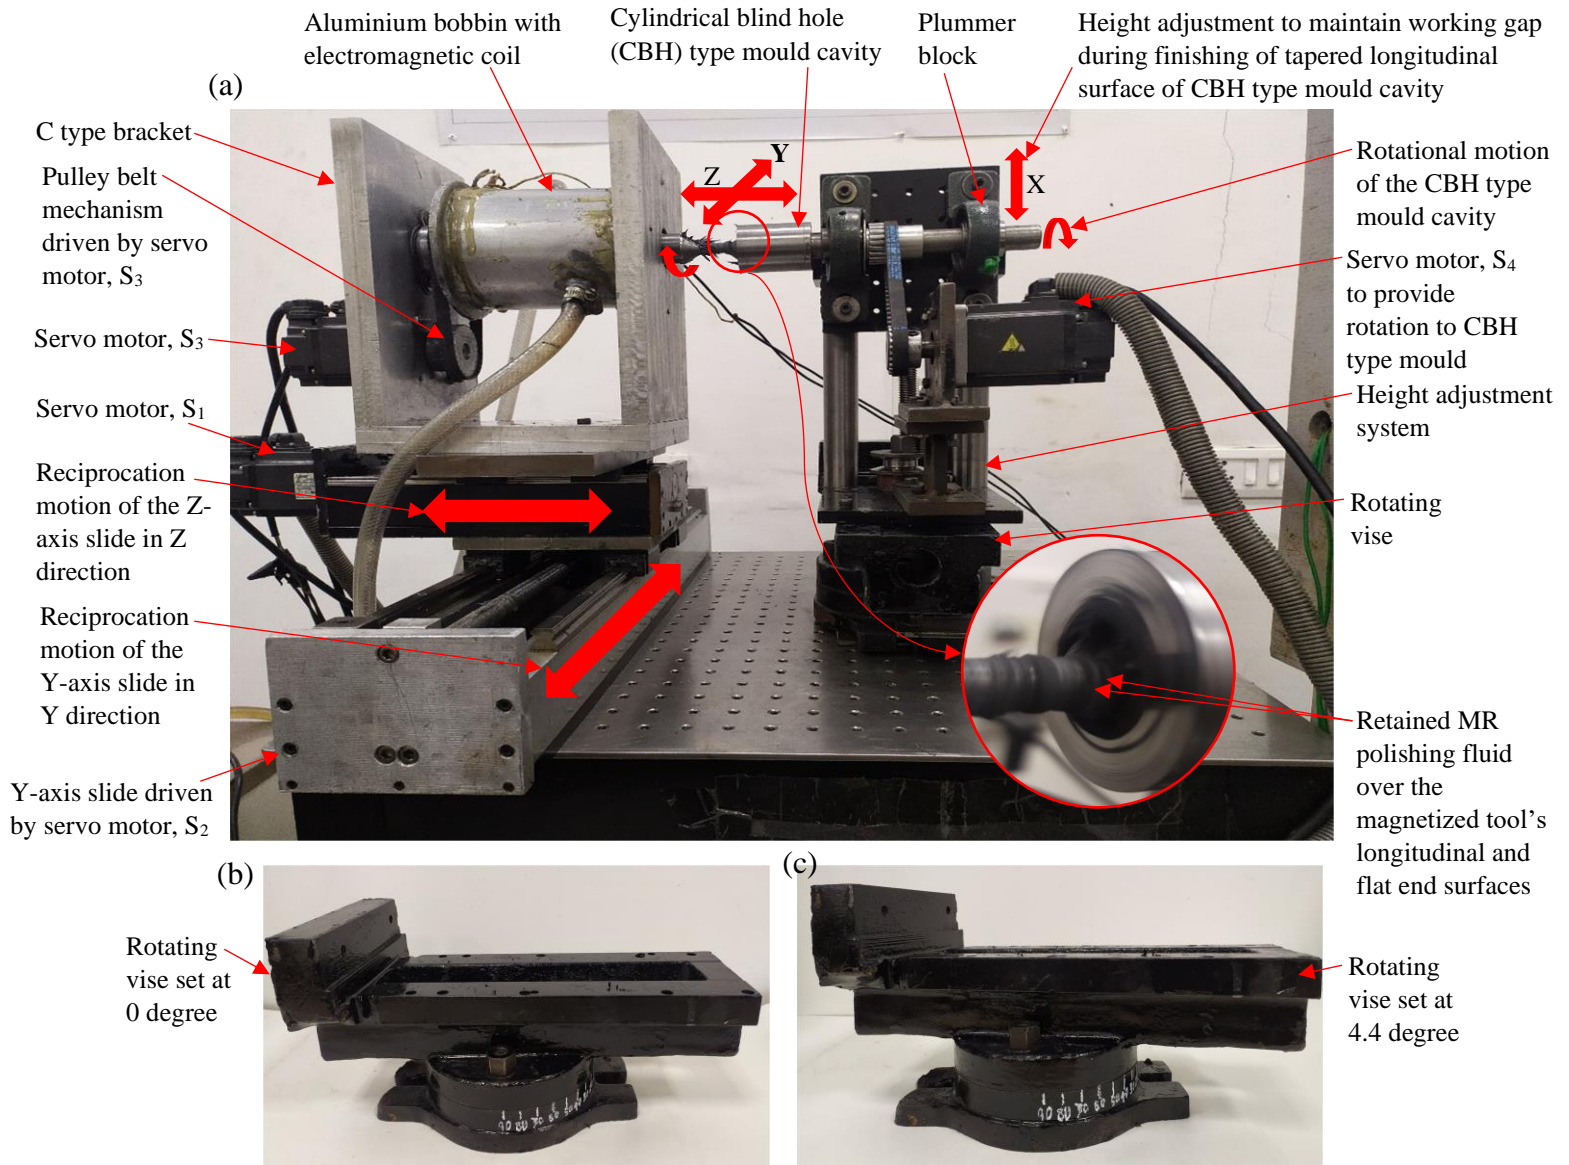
Photograph of the (a) experimental setup during finishing with the magnetorheological grinding (MRG) process over the internal tapered longitudinal and flat end surfaces of the CBH workpiece, (b) vise fixed at 0 degree for finishing the flat end surface and (c) vise fixed at 4.4 degree of rotation for the MR finishing over tapered longitudinal surface of the CBH type mould cavity.
